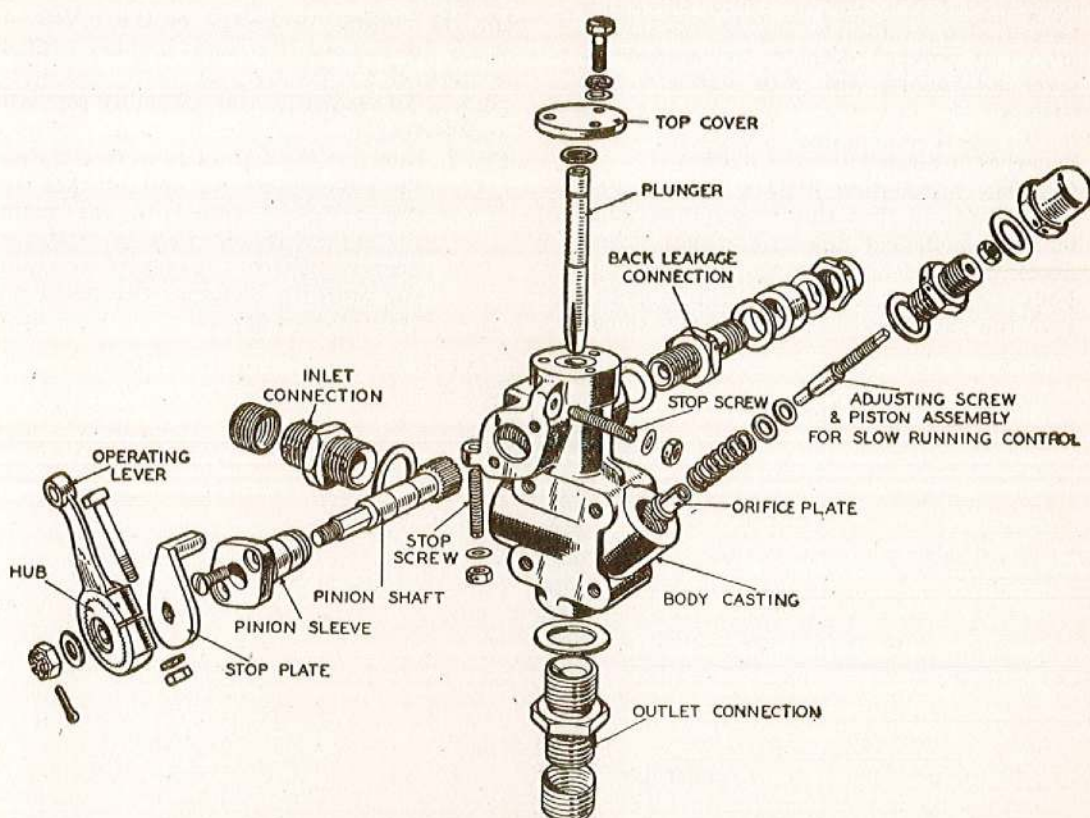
T.V.A.3/1A throttle valve, completely dismantled
